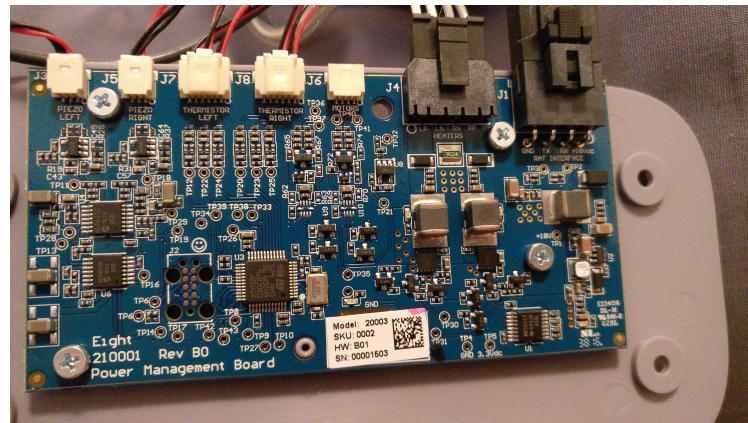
A closer look at the EightSleep PCB inside the controller box.
